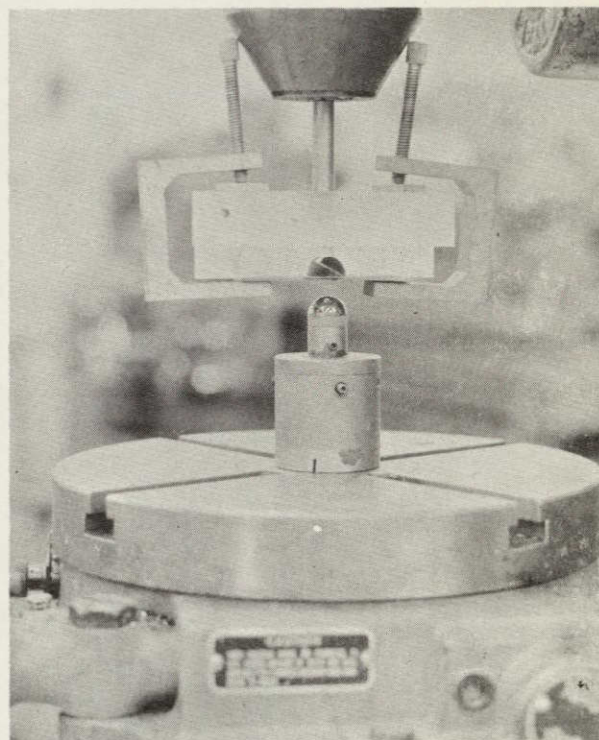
The Mask is Held in the Spindle of a Milling Machine; One Male Bearing Coated with Photo-resist is Directly Underneath the Mask
